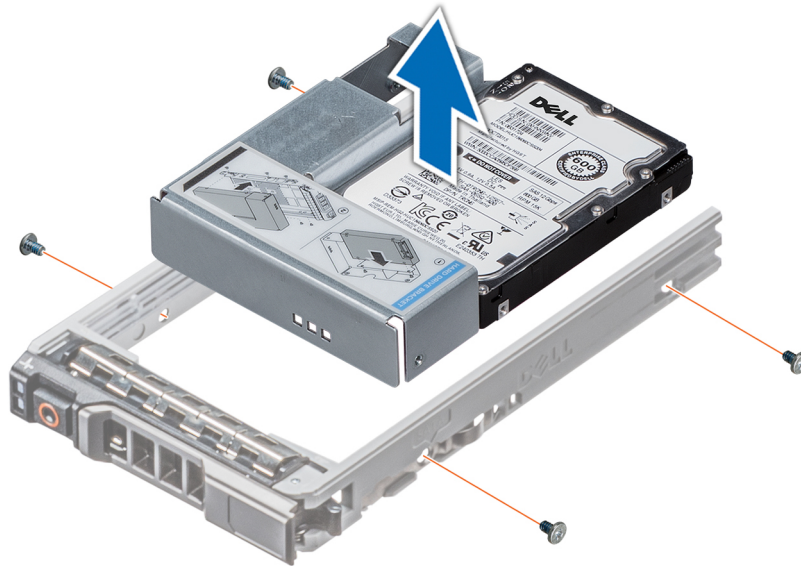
Removing a 3.5 inch drive adapter from a 3.5 inch drive carrier
